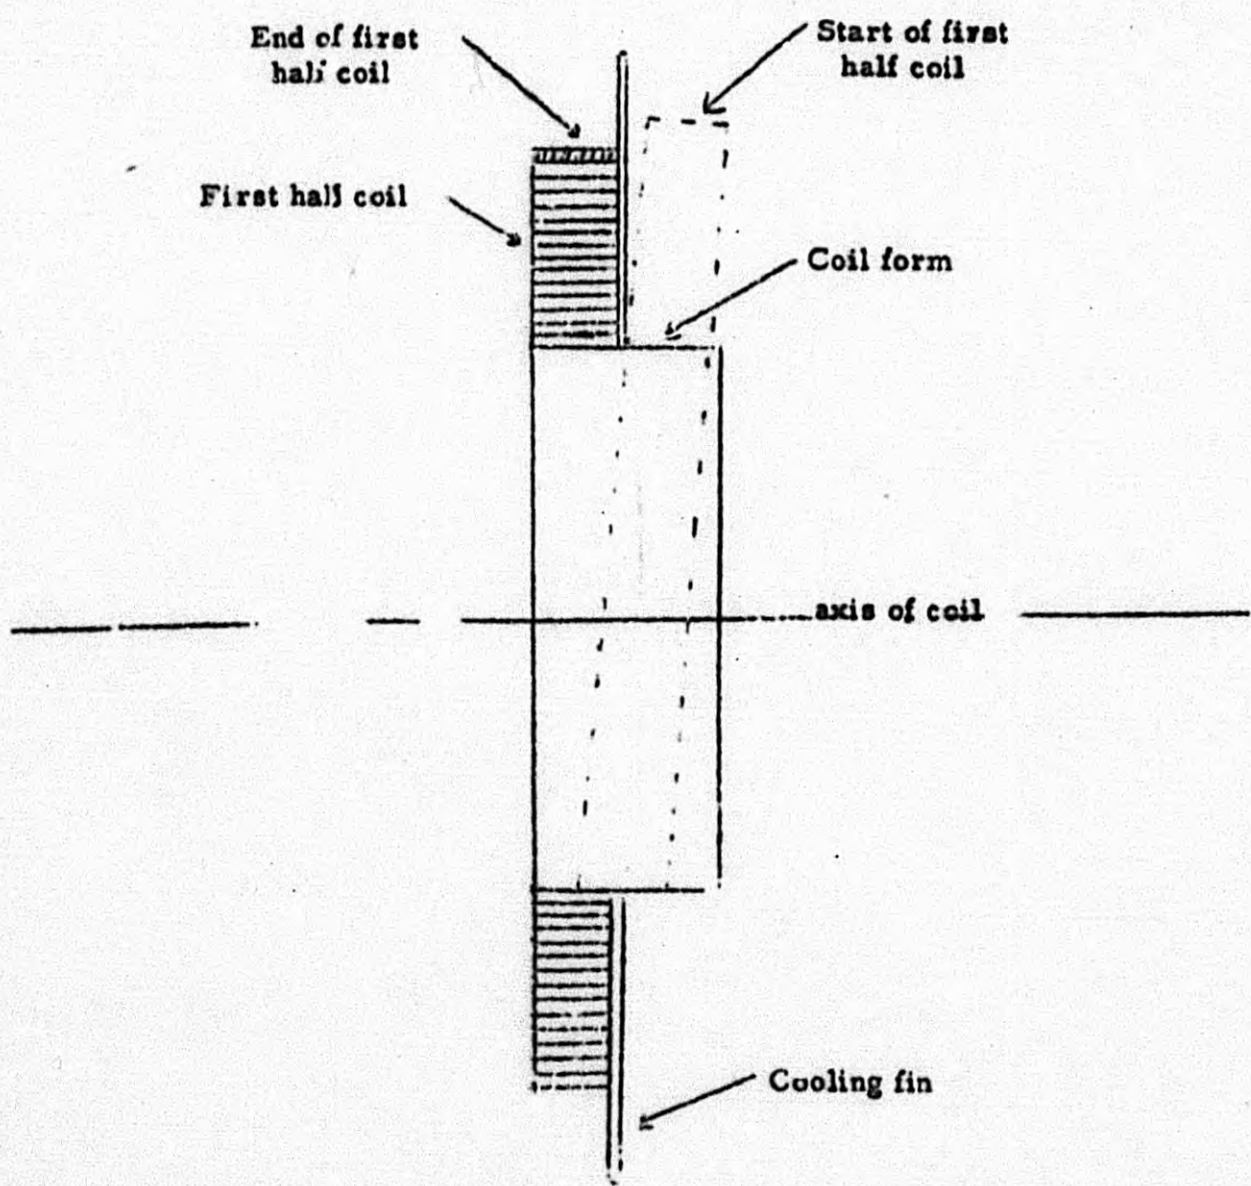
Unit coil for straight section. First half coil completed and cooling fin installed at center of unit coil.
